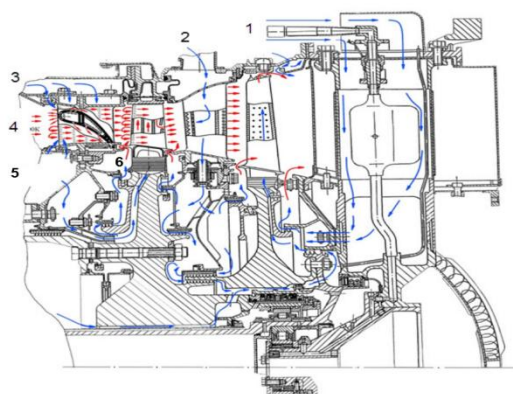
Construction of a turbine without heat exchanger and its cooling mechanism.
